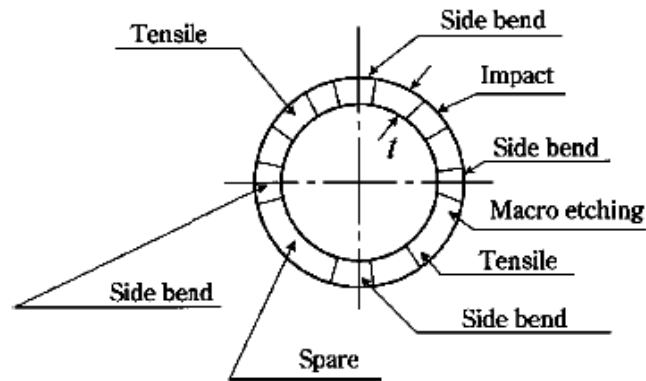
(a) Welding Procedure Qualification Test assemblies (Unit: mm)
